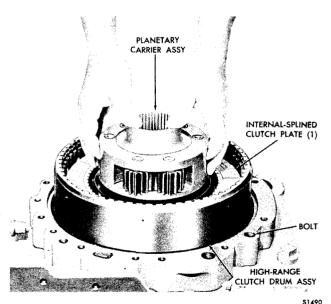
Installing low-range planetary carrier assembly (-3 underdrive model)
